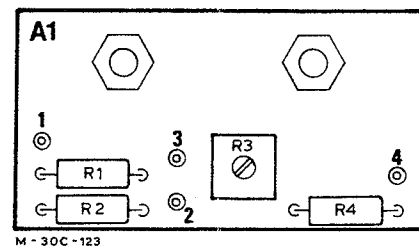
Assembly Detail - NAC27 Control/Monitor Panel (Rear View)
